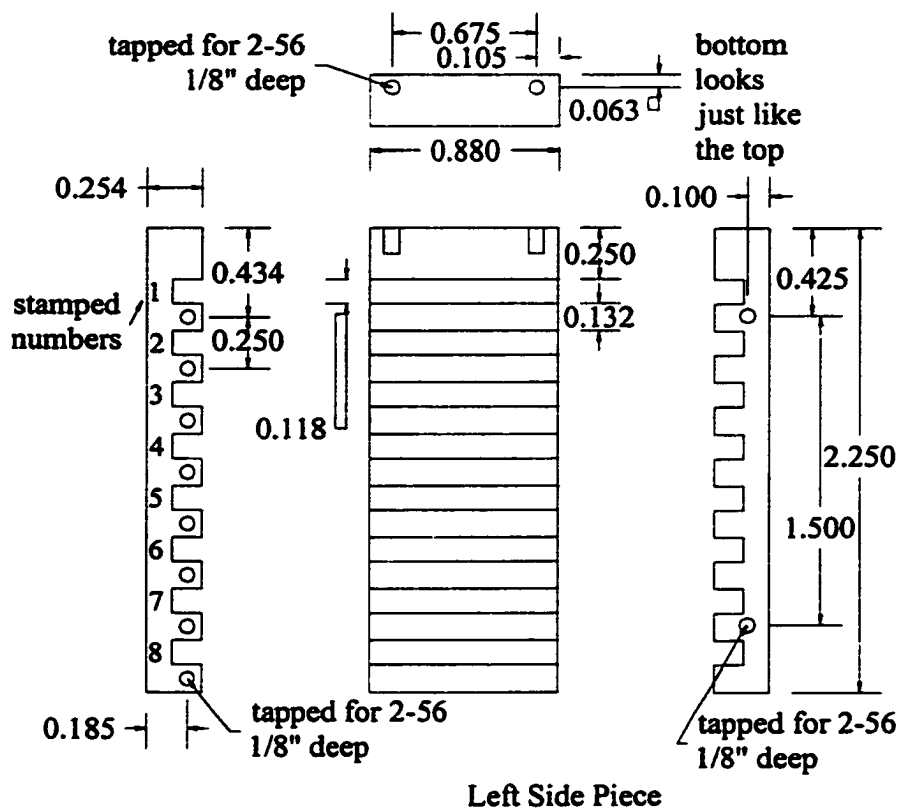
Design drawing for the side plates of the aluminum sample storage garage.
